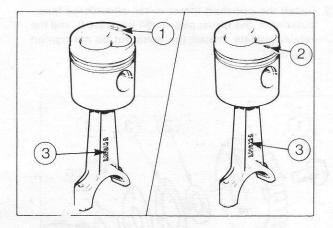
Piston and Connecting Rod "Fitting" Marks (Towards Front of Engine)
